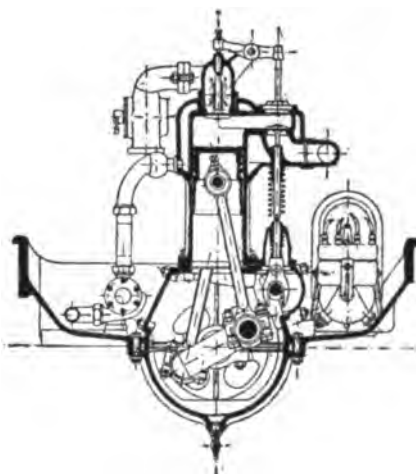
18 H.P. Horch Automobile Engine.
